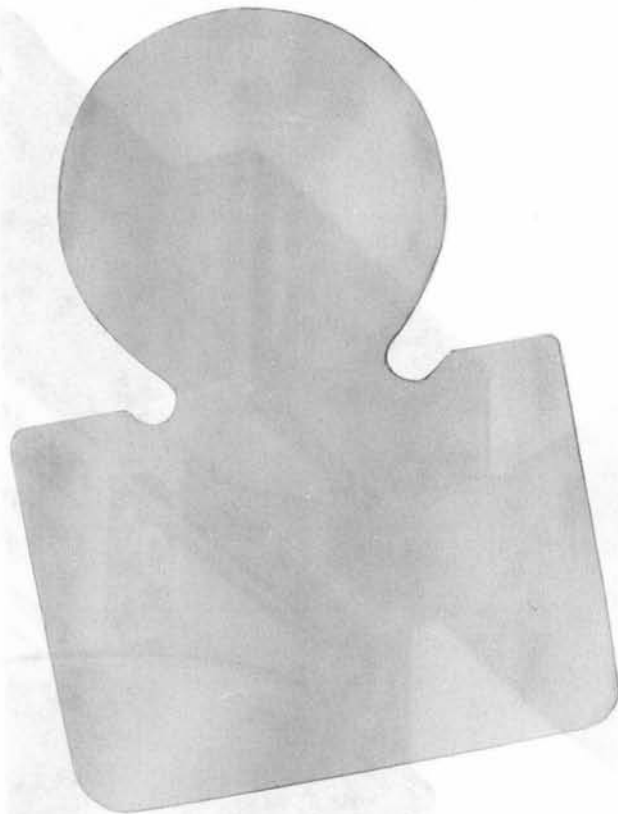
KS-22551 (Stainless Steel Nonmagnetic) Gauge
